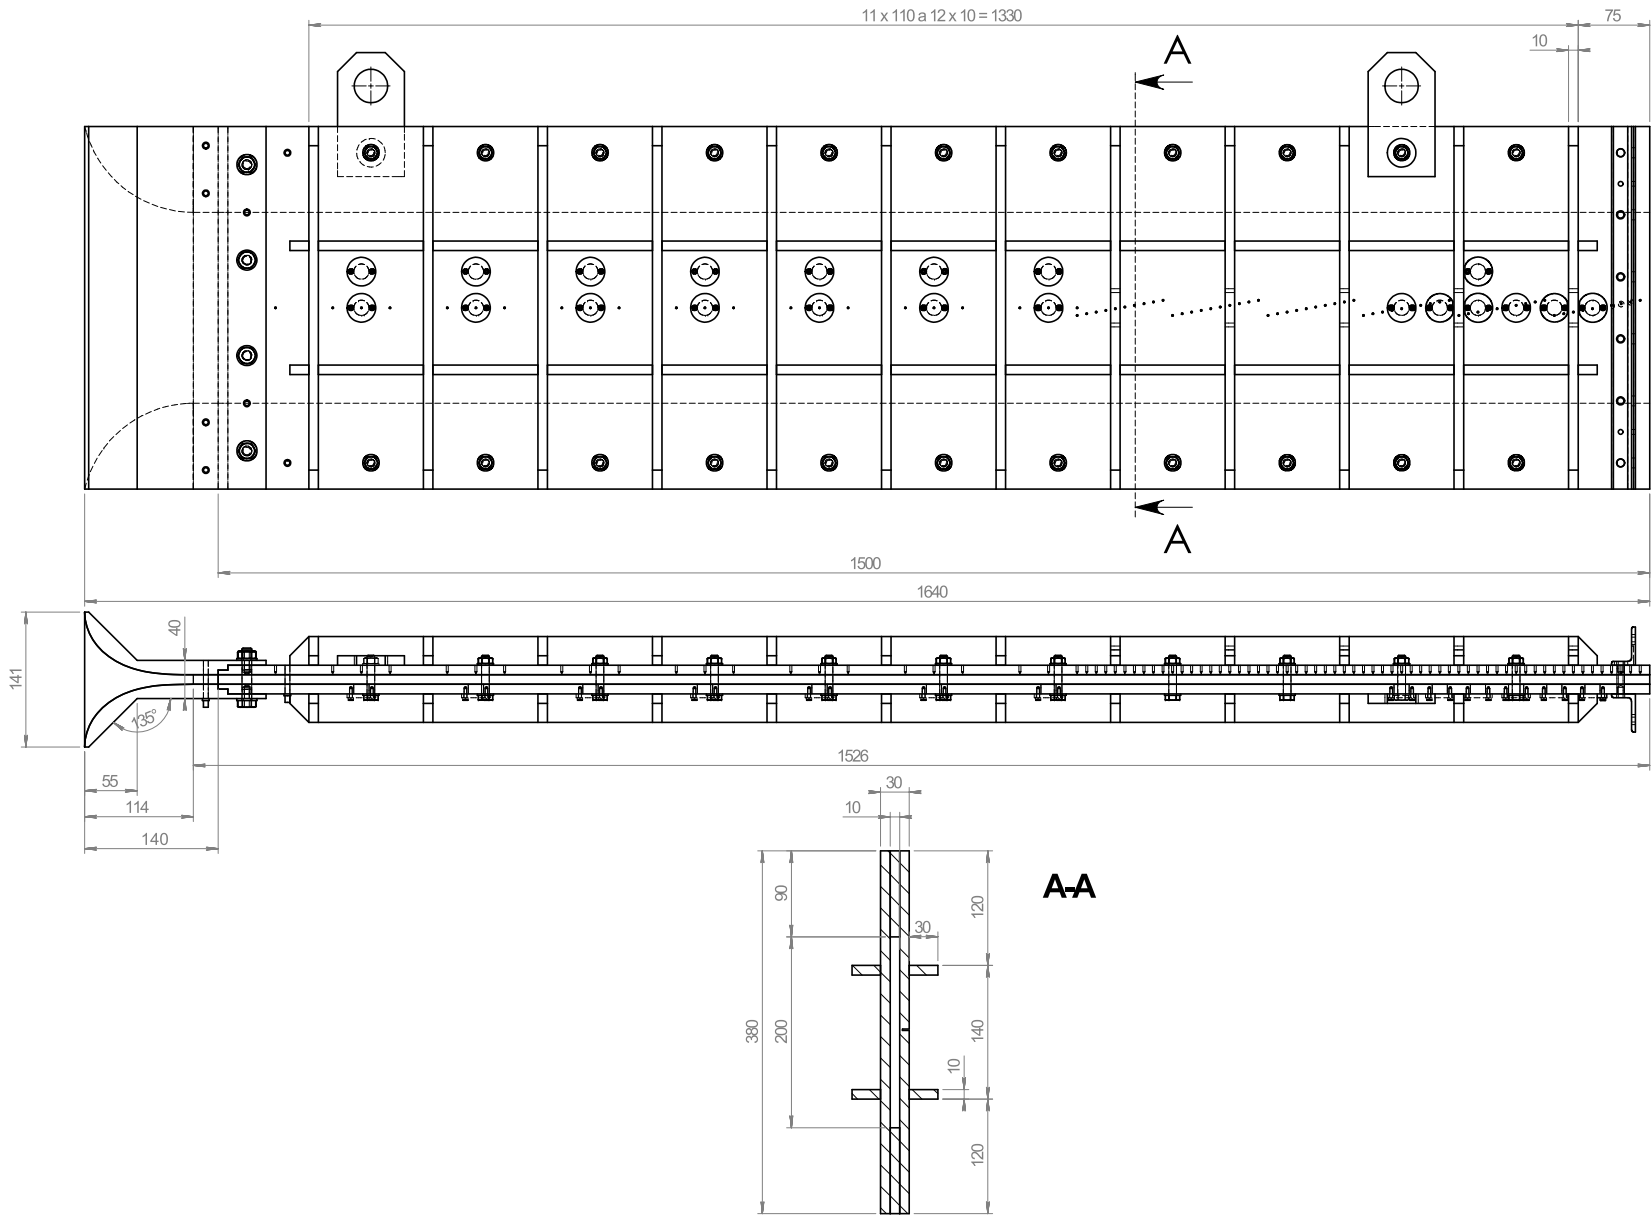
Drawing of the calibration channel assembly with its main dimensions.
